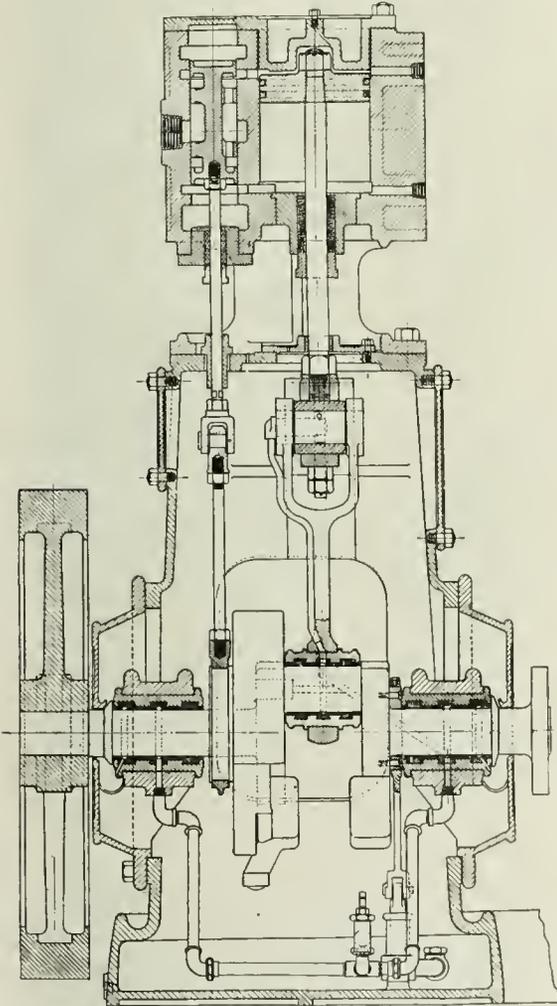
Sectional View of Steam Engine showing Lubricating Mechanism
